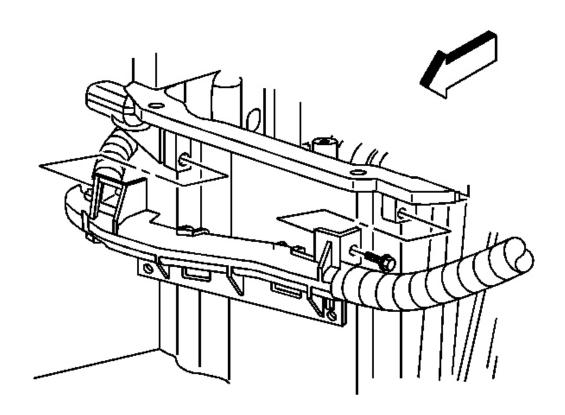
View Of Battery Cable Channel & Bolt Courtesy of GENERAL MOTORS CORP.
